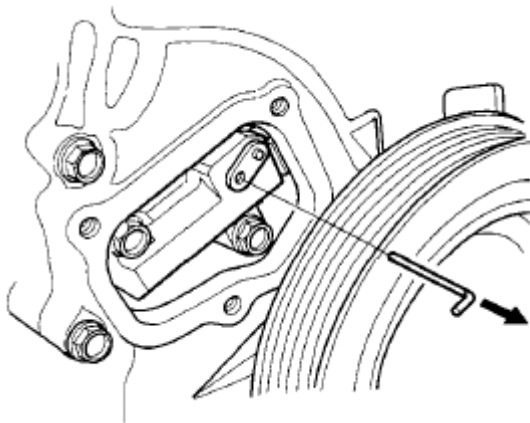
Identifying Lock Pin And Auto-Tensioner
